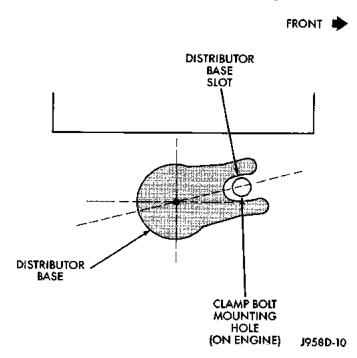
Distributor Engaged Position—4.0L 6-Cylinder Engine
